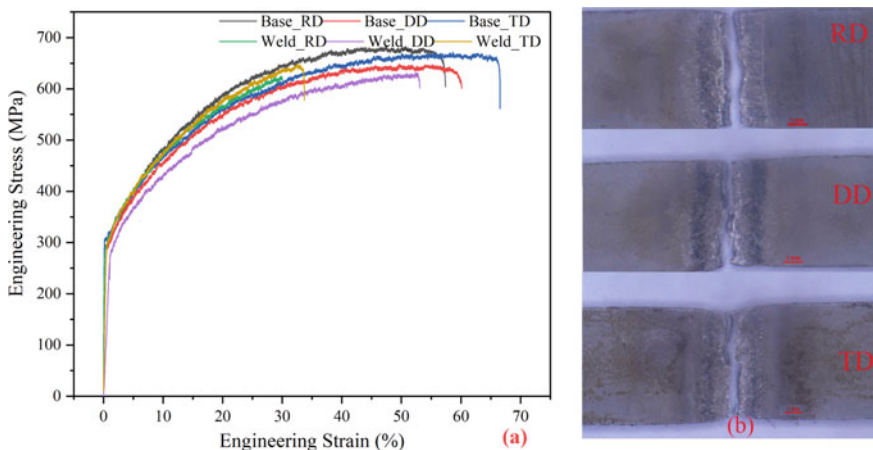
a Engineering stress–strain curve for 316L SS base and welded samples in different orientation b macro view of tensile failure welded specimens in RD, DD, and TD
